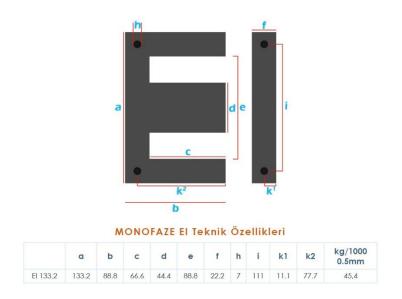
El133.2 core datasheet details (All dimensions are \*in millimeters)
